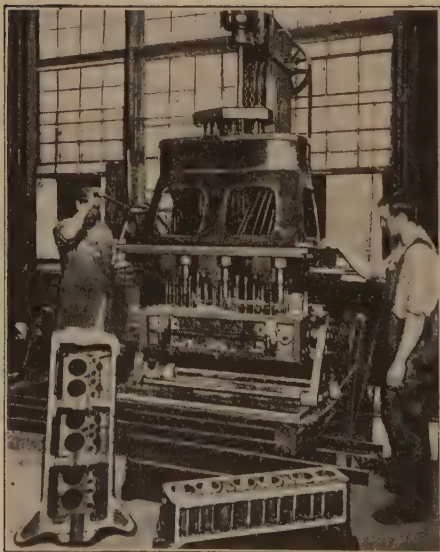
Drilling aluminum crank cases. Note the size of this multiple drill.
